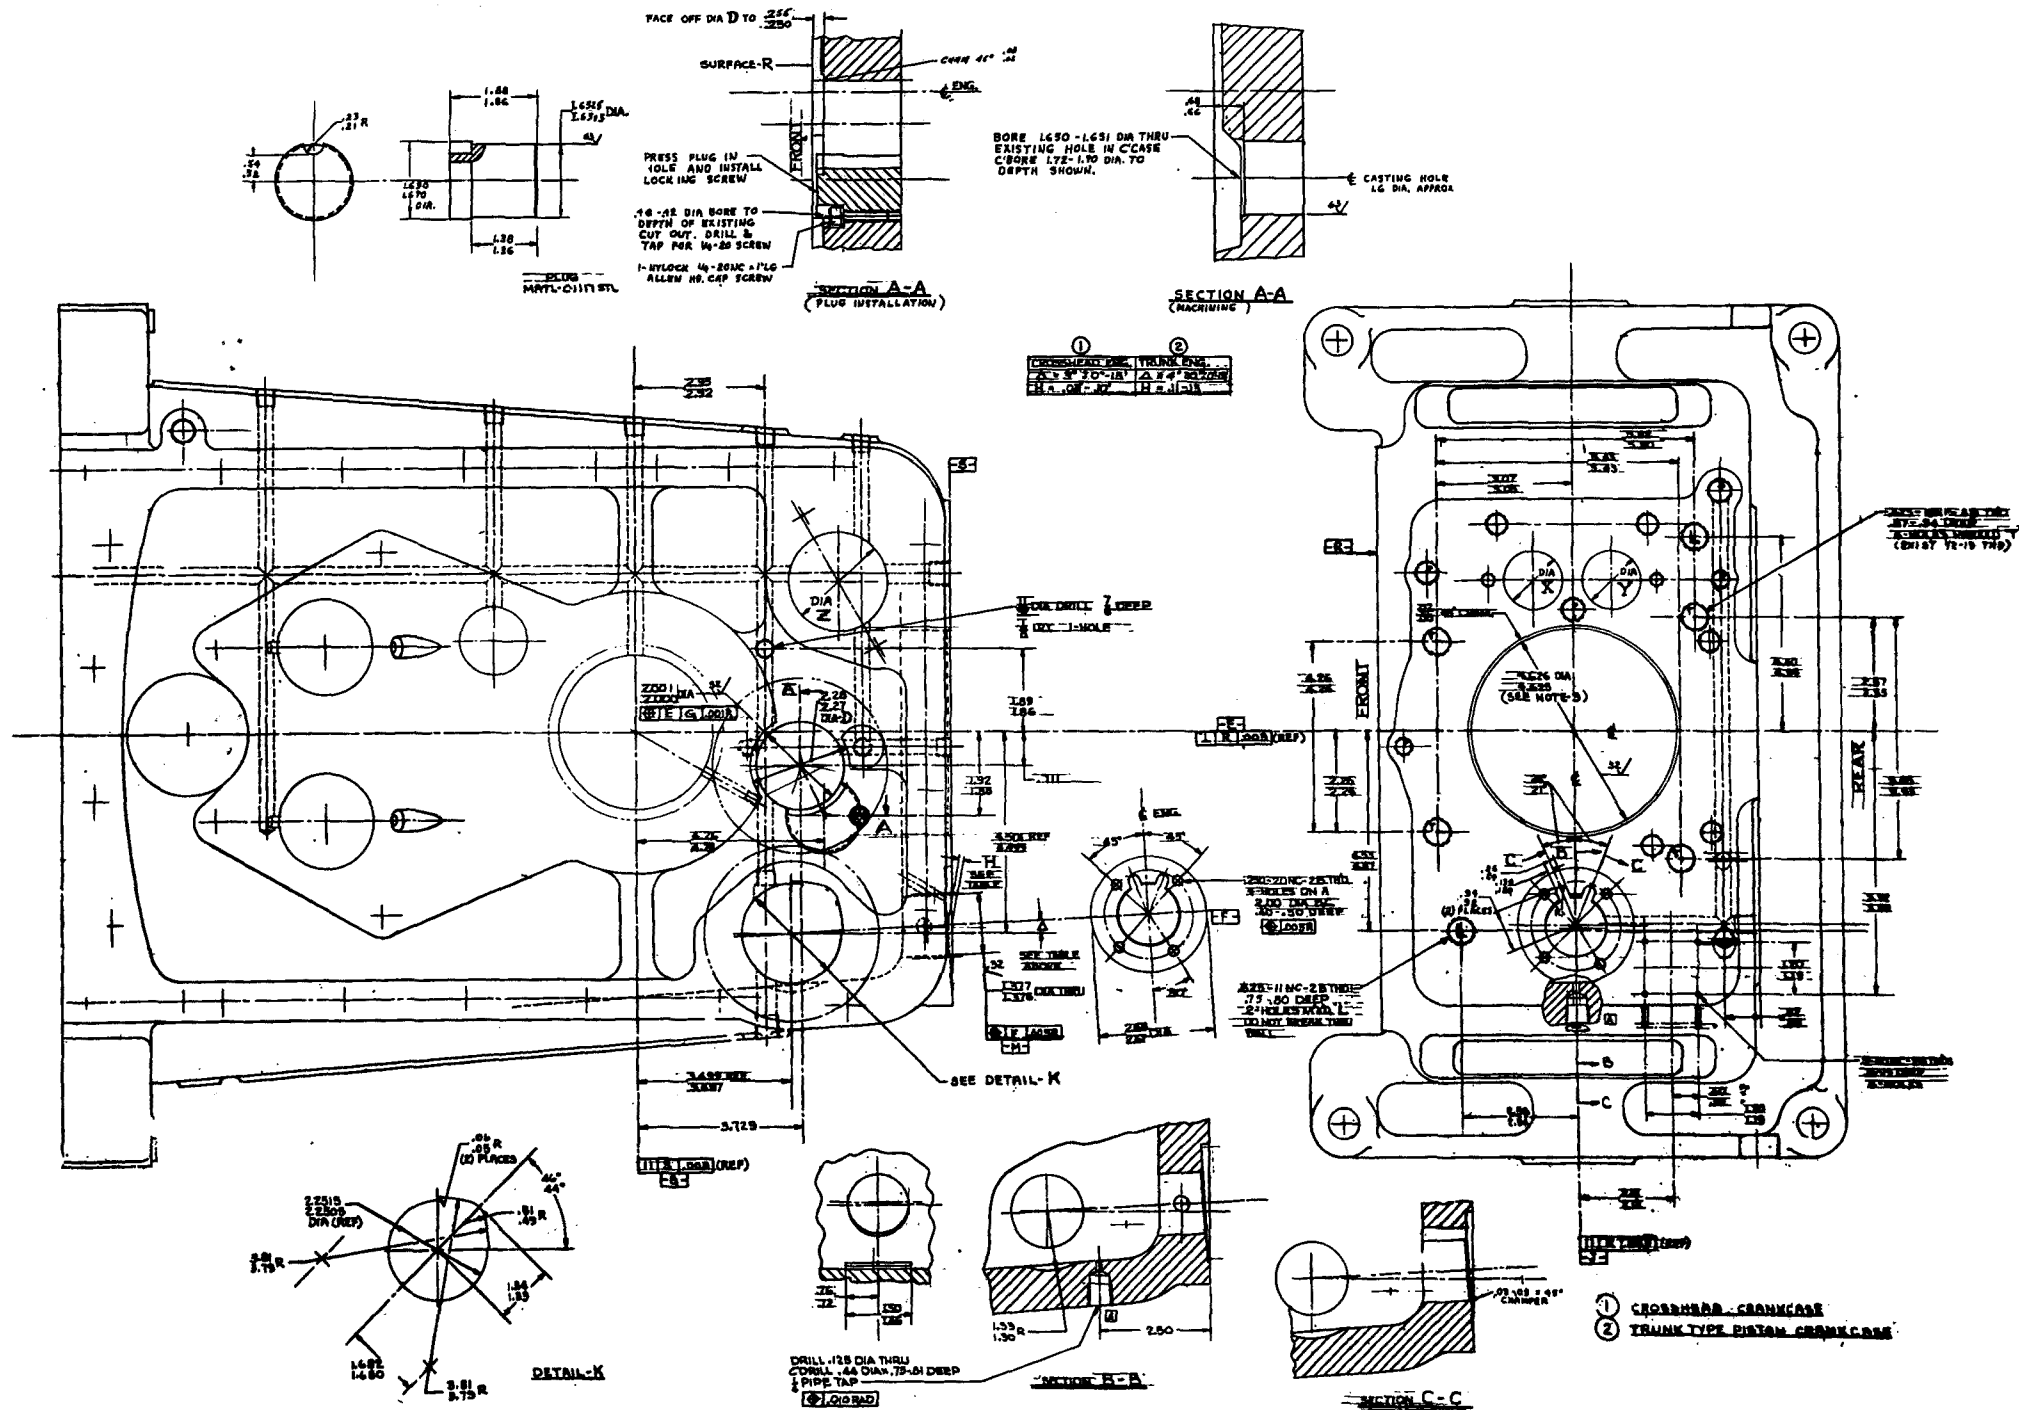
Steam Expander Crankcase, Modification Details (GE Dwg. 221R901).
